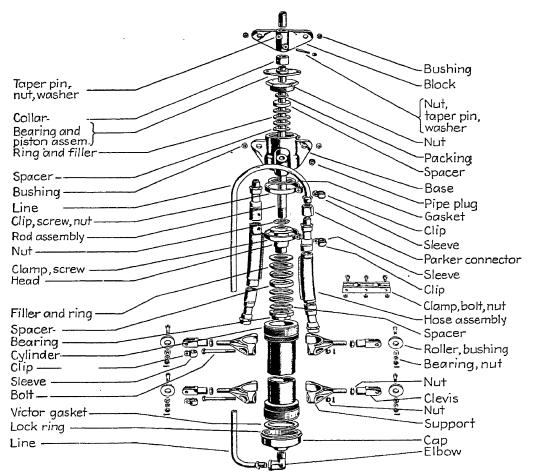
Strut assembly. Wing-flap operating. (Courtesy of Douglas Aircraft Co.)
